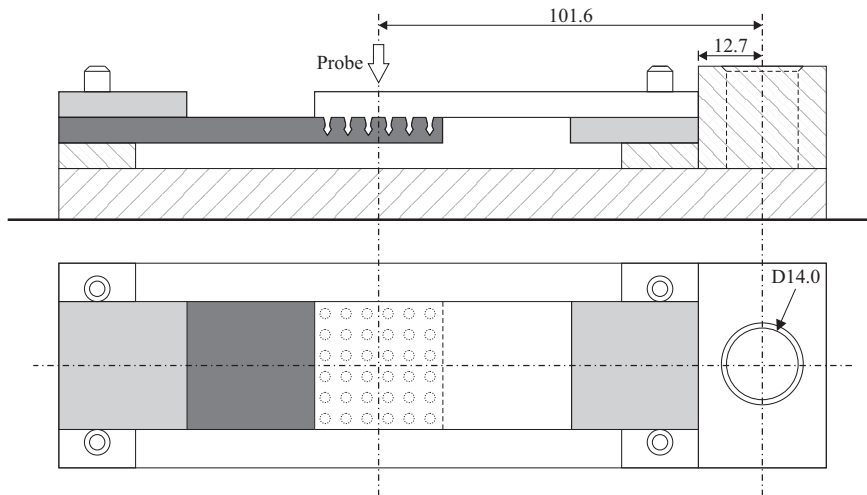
Jig used for calibration of probe orientation and alignment of test specimens. The coupon can be positioned with either substrate uppermost and inspection conducted through either the metallic or composite side of the joint.
